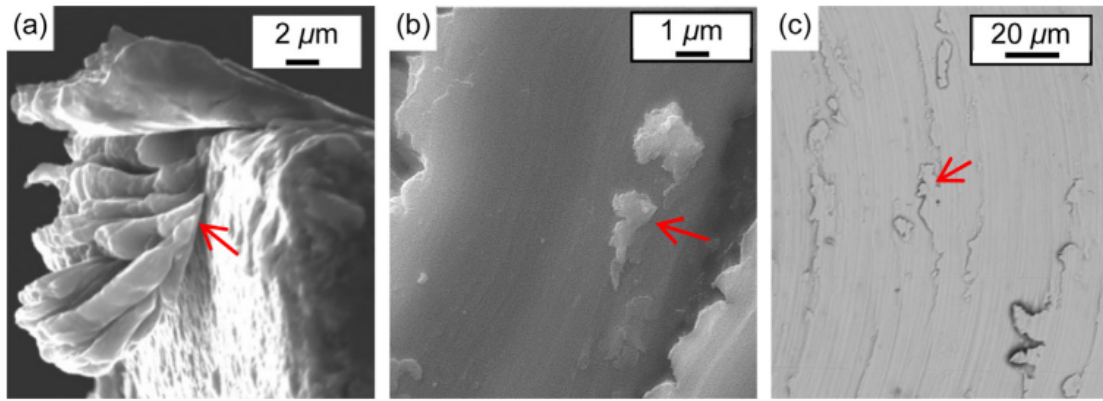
BUE deposits on (a) microtool rake face, (b) chip flank face and (c) micromilled surface (WANG et al., 2016).
